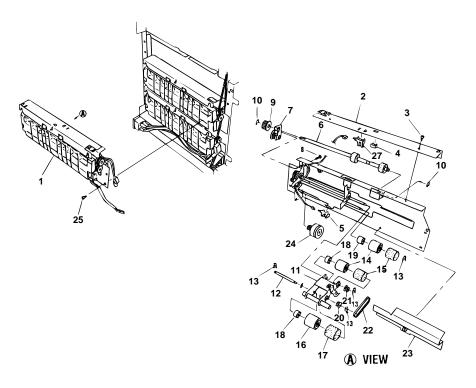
Paper Feed Unit Parts Locational Diagram
